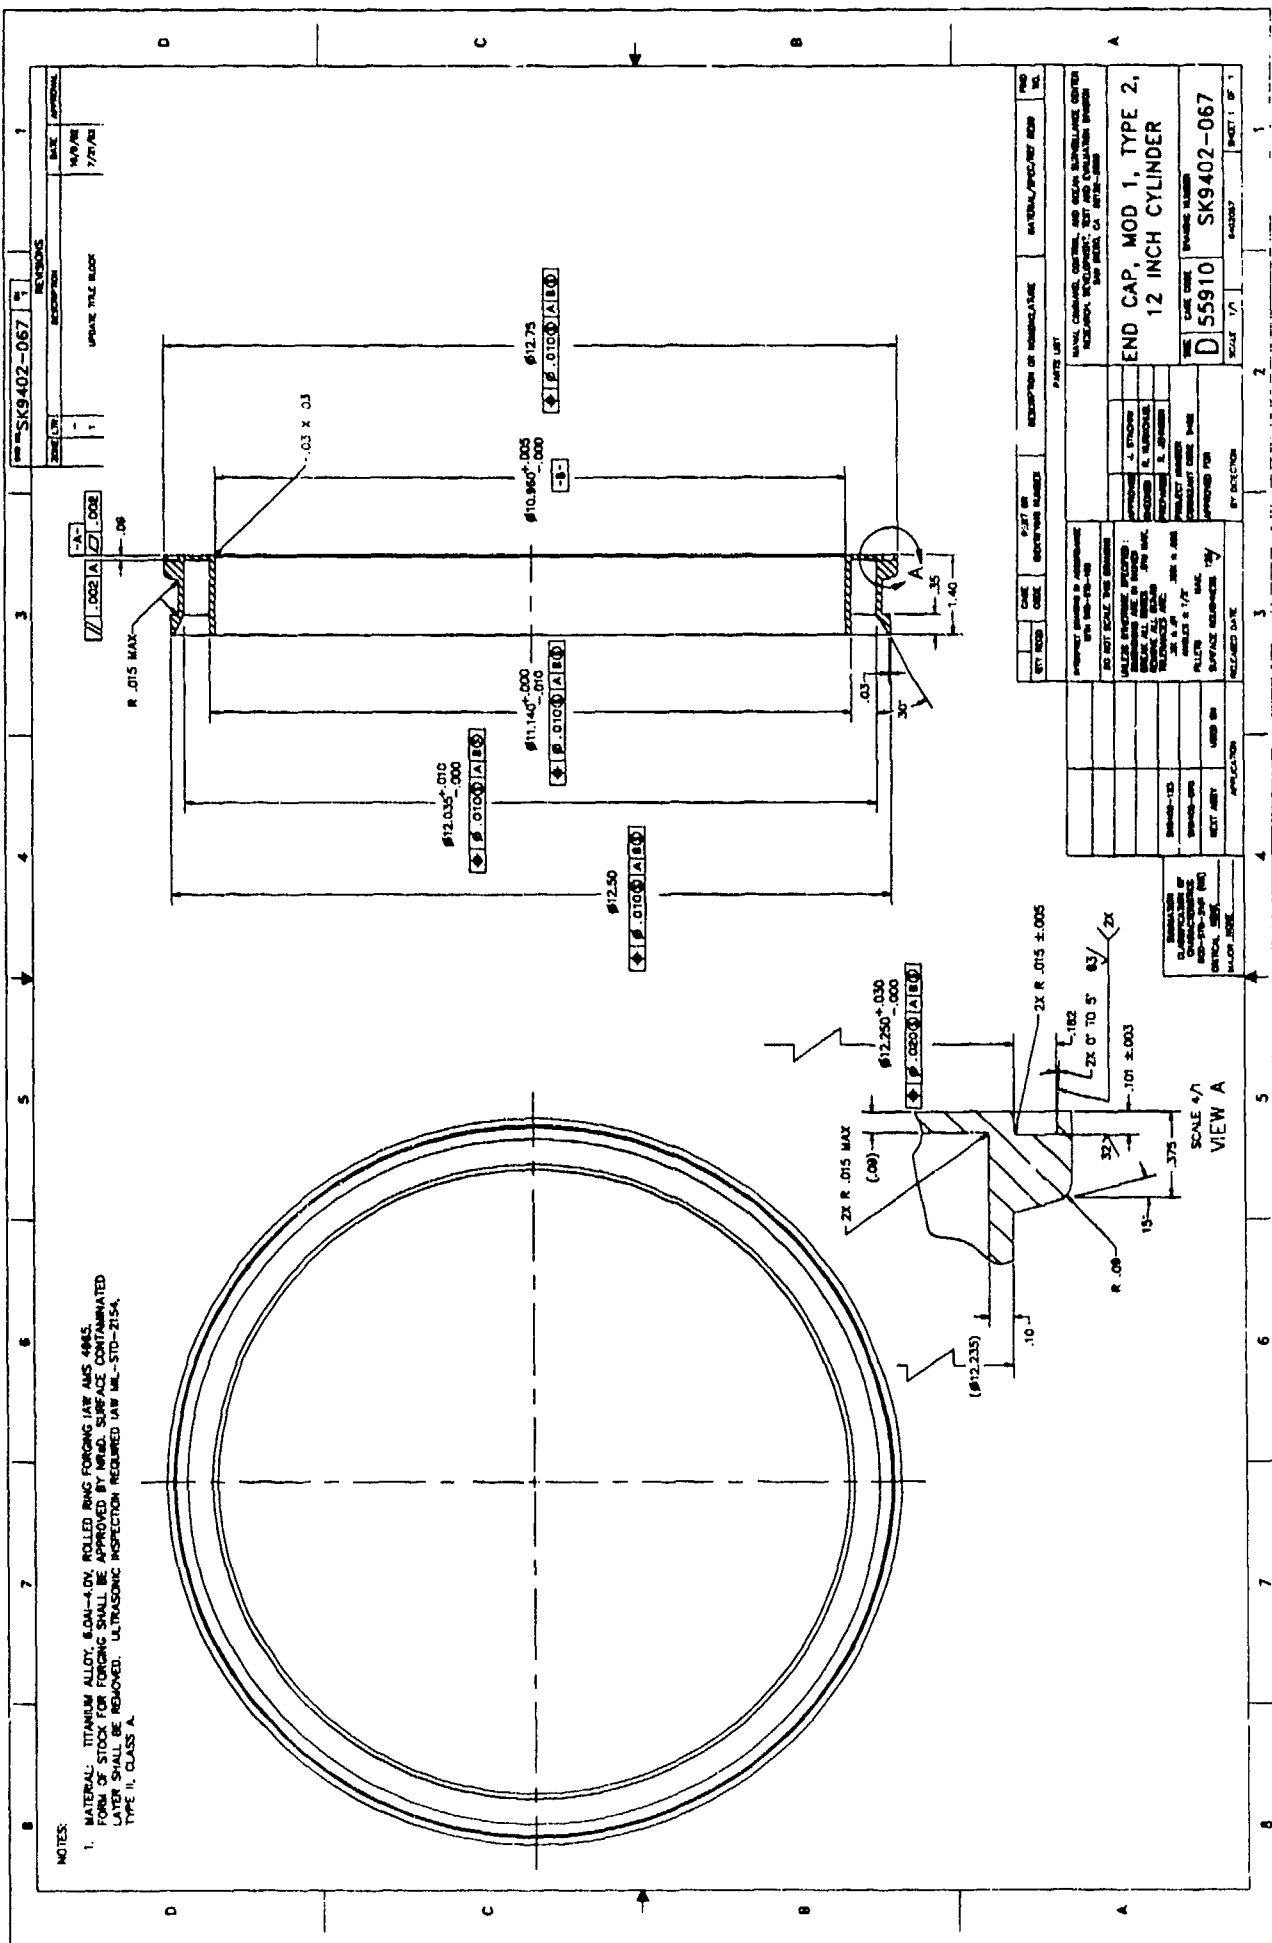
12-inch cylinder test assembly I configuration, Sheet 3.
